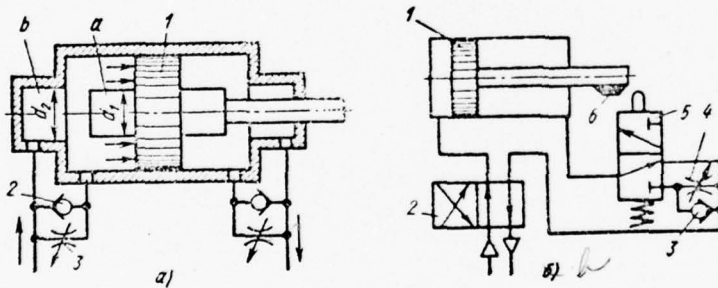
Pneumatic actuators with braking device: a) internal; b) external. Figure 237b shows the schematic of the pneumatic actuator of the machine tool, controlled with the aid of the established/installed on shaft master switch or another part of the machine tool, tumbler 3, the velocity of rotation/revolution of which determines the duration of cycle. With submerging by the
